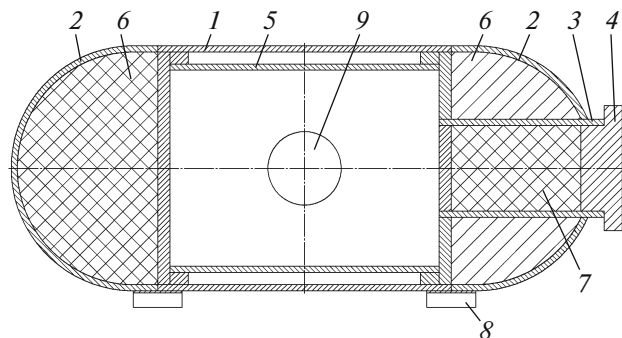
General scheme of the EPC: (1) load-bearing hermetic housing; (2) bottoms; (3) loading orifice; (4) lid; (5) housing protection; (6) bottom protection; (7) lid protection; (8) supports; and (9) dangerously explosive object (explosive charge).
